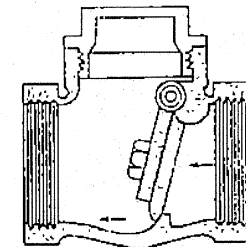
Swing Type of Check Valve (Flap Type)
